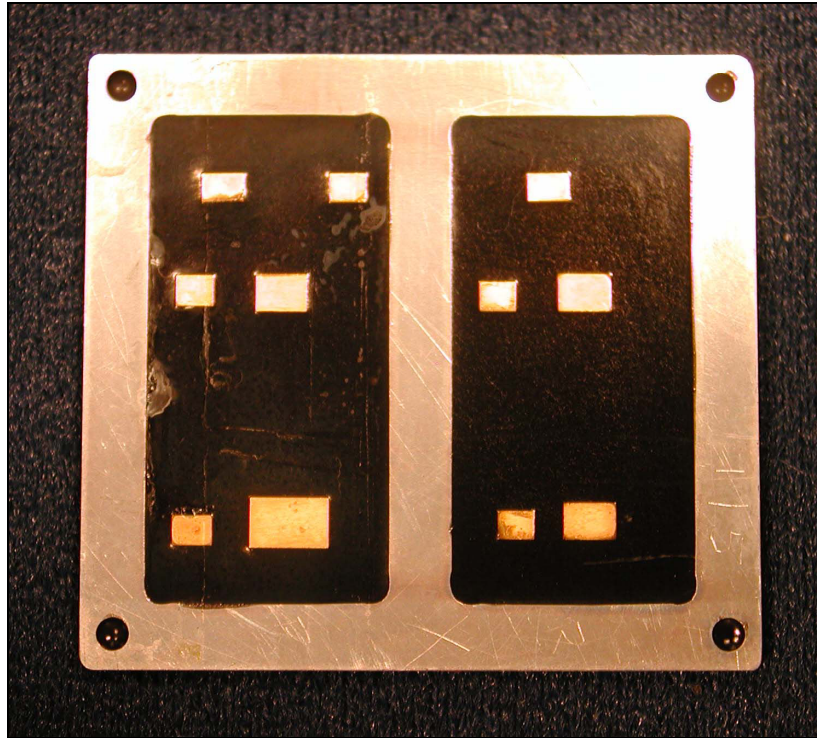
Ku-band Module bottom view showing the aluminum shield frame
